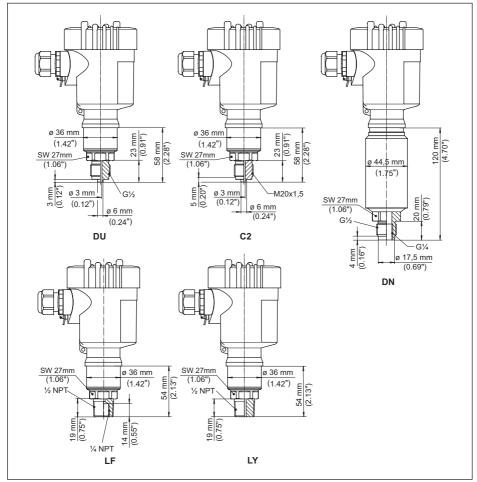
VEGABAR 83, threaded fitting not front-flush
